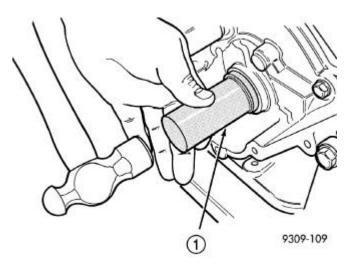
Crankshaft Oil Seal with Special Tool 6342 - Installation Courtesy of CHRYSLER LLC
